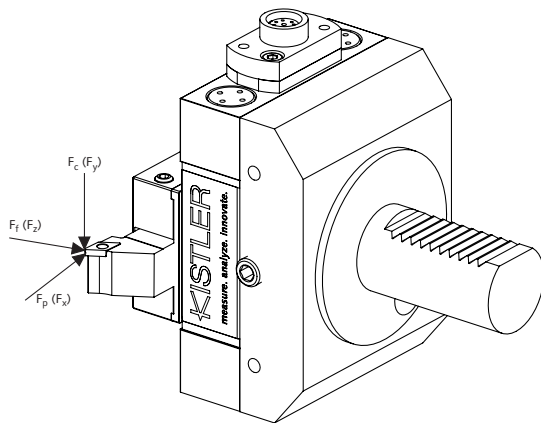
Dynamometer Type 9119AA2 with tool holder Type 9119AE16 and VDI tool holding fixture Type 9119AB30S
